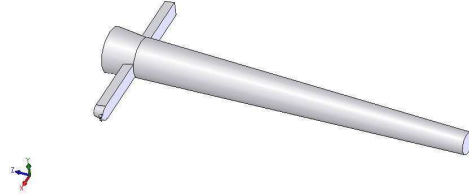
3D model of the single gate runner used on the “BA00” moulding blocks
